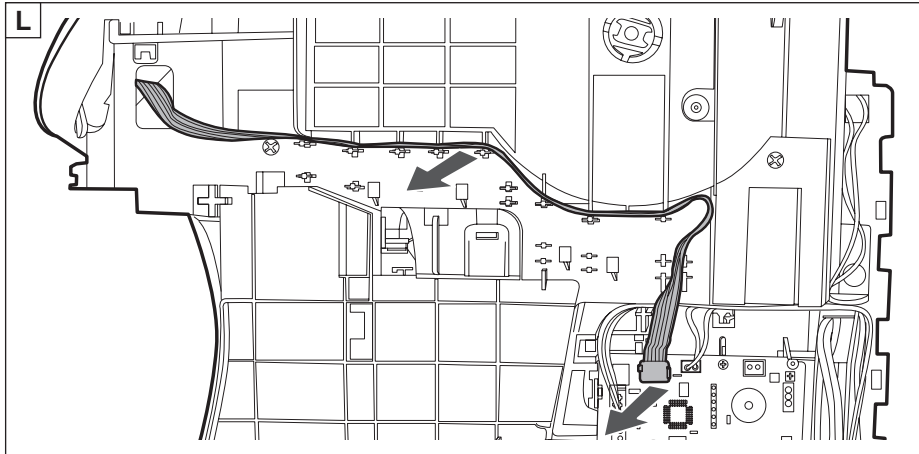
Figure L: unplug the USER INTERFACE connector, slide the cable out, and completely remove the top cover.
